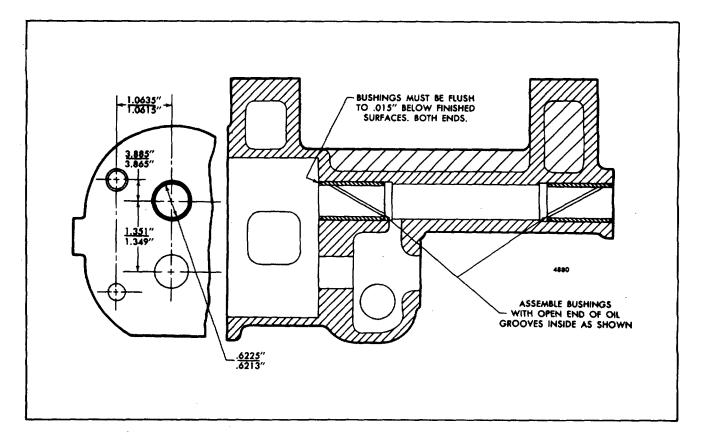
Diameter and Location of Bushing in Oil Pump.
